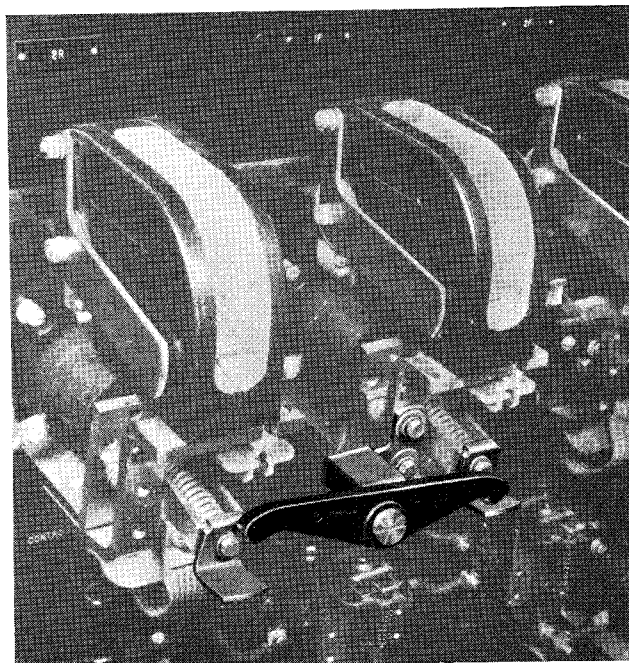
Type M-27 Mechanical Interlock Assembled on Two Type M-410 Contactors
